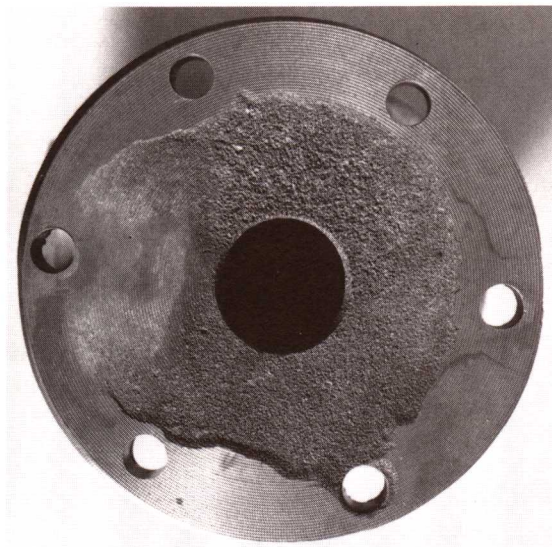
Crevice corrosion under a valve flange in a pipe which carried heated seawater.
